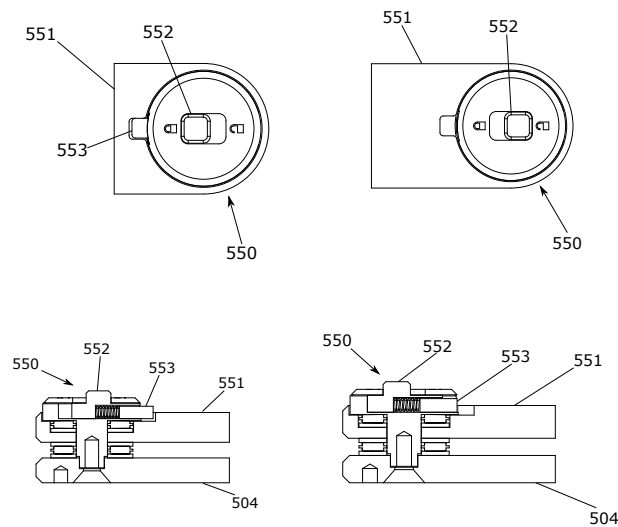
Horizontal Joint Locking Mechanism (a) locked (b) unlocked.
